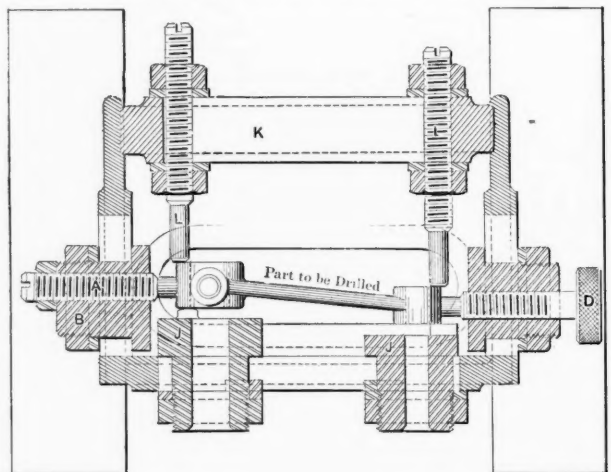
Vertical Section through Cover Screws and Jig Bushings.
